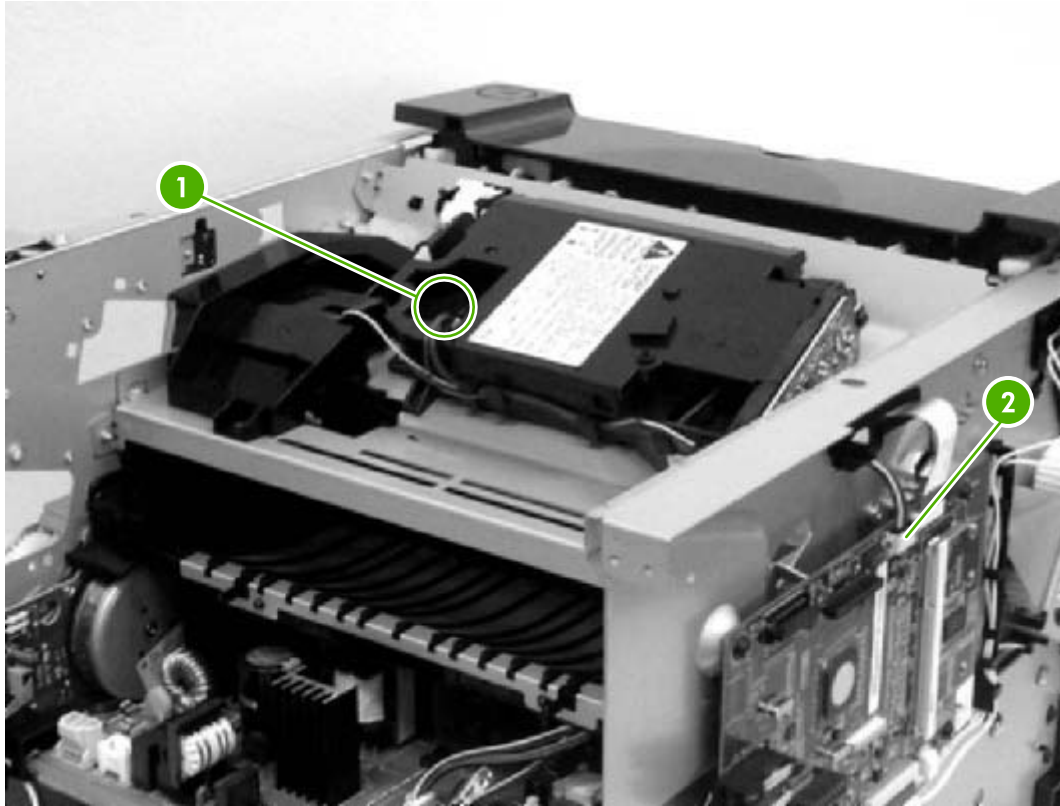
Removing the memory-tag-reader assembly (1 of 2)
